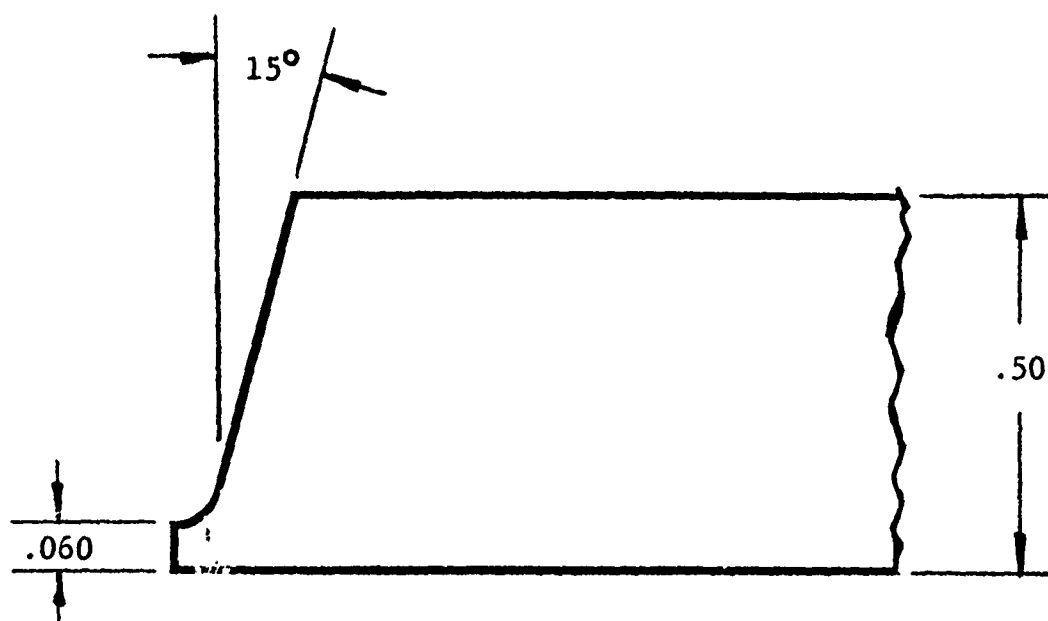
TEST PLATE J-GROOVE CONFIGURATION
